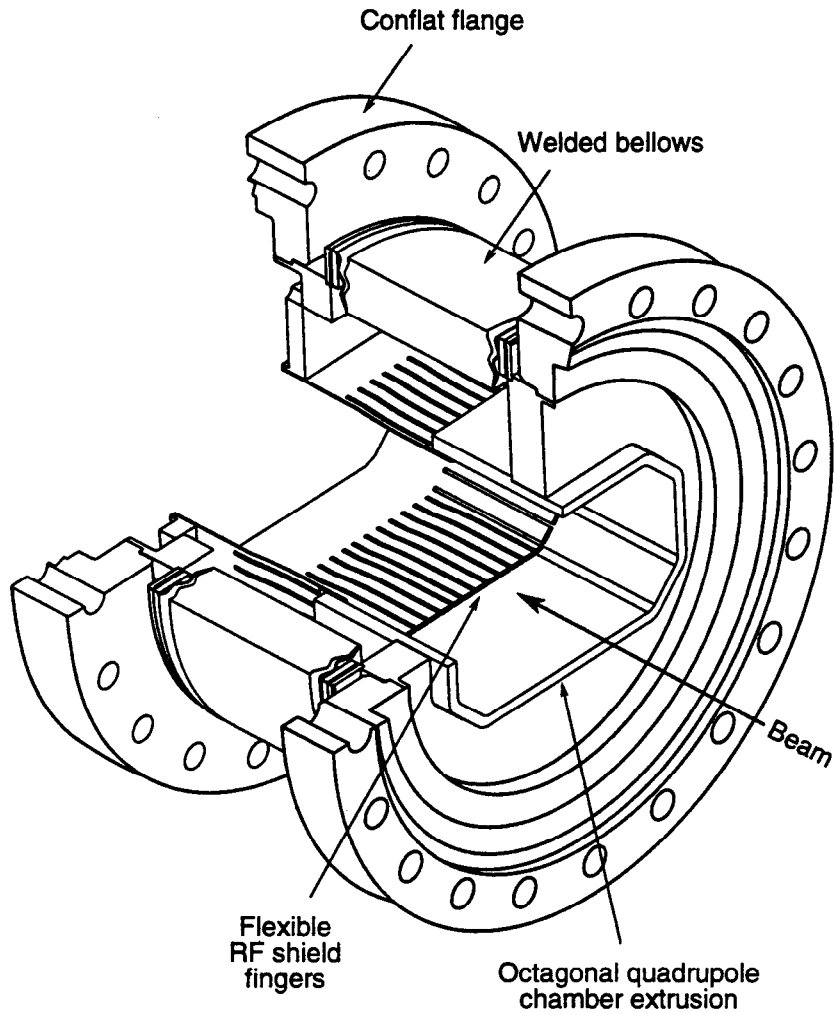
CAD illustration of the HER arc bellows, showing inner RF shield.
